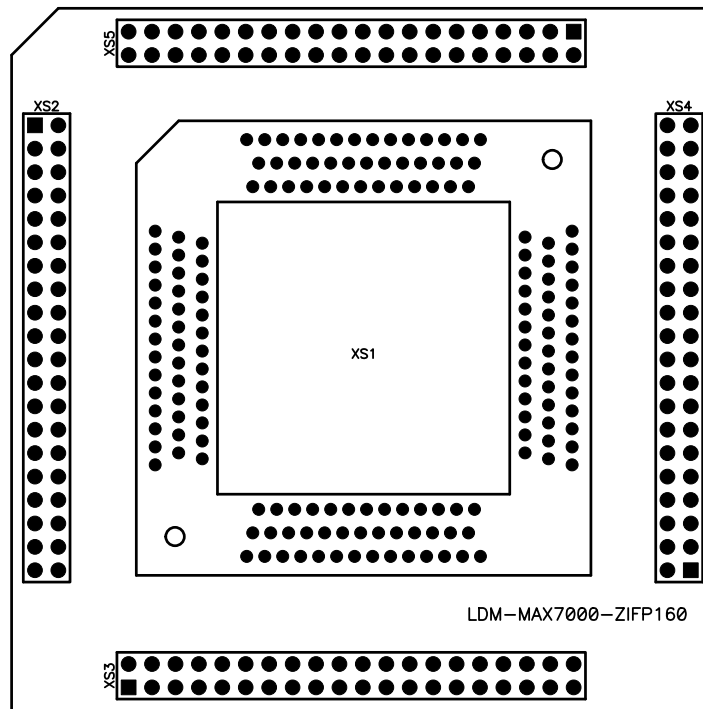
Location of elements on the development board of the expansion module LDM-MAX7000-ZIFP160
